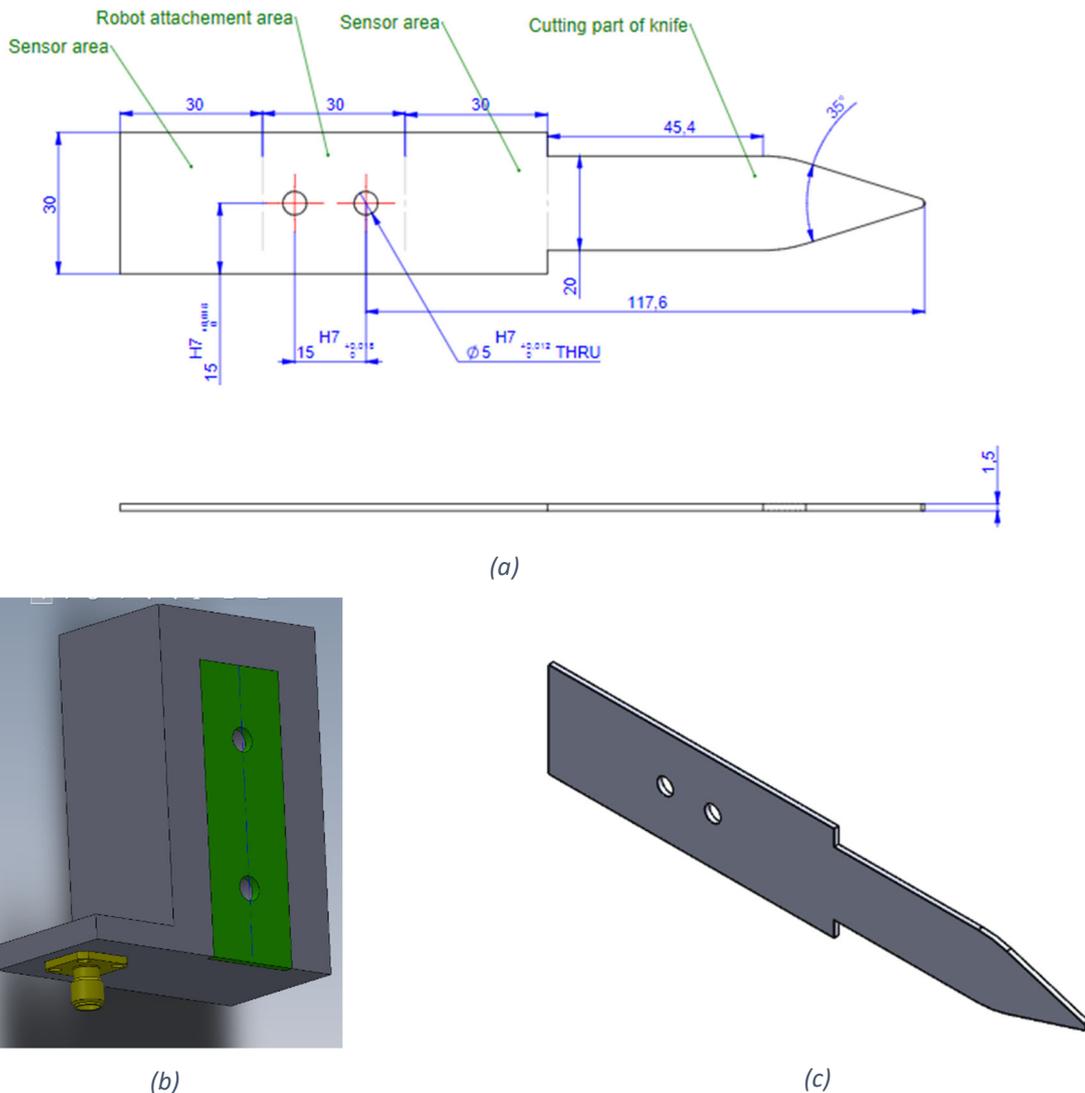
(a) Possible design of a bespoke knife; areas for sensors and robot attachment indicated in the first 90 mm. This constitutes the shaft part of the knife. However, the angle between the shaft and the blade should not be 90°. (b) Knife-to-robot adaptor/block with the shaft part of the knife blade indicated in green and a sensor in yellow. Such a shaft design is fixated to the fastening block on the robot using wing nuts or a steel plate cover. (c) Sketches illustrating knife with shaft. *Image source* (a-c): Oddgeir Auklend, ROBOTNORGE.
